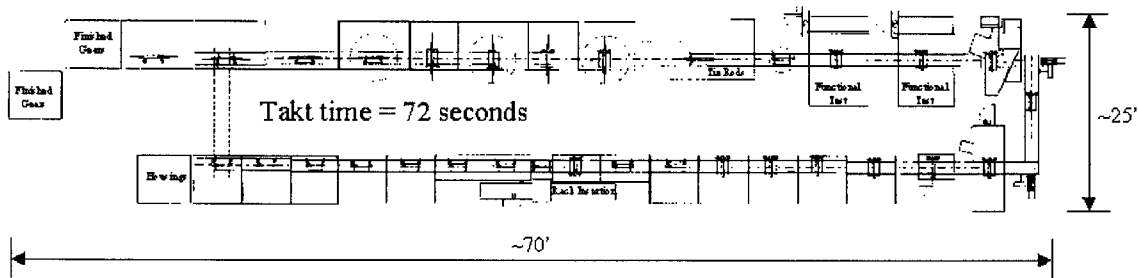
New Indianapolis DEW98 Assembly Cell Layout for Manufacturing Steering Gears
